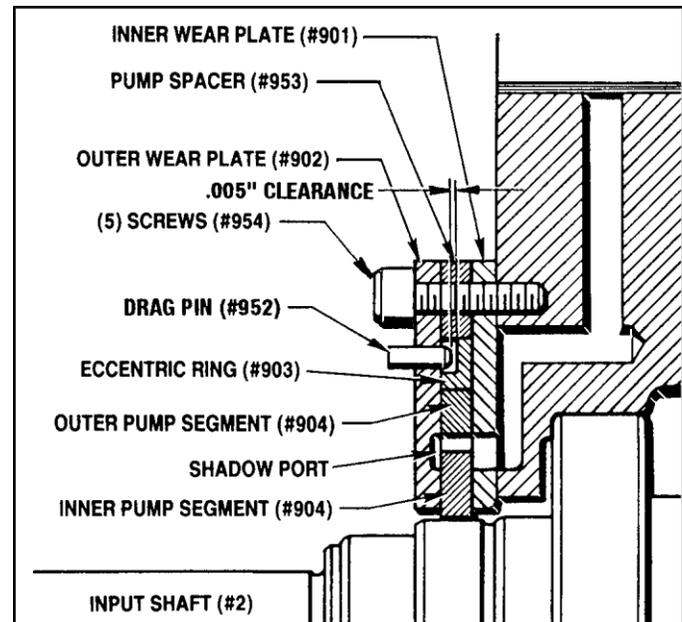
Hydraulic Pump Assembly (Cross Section)
